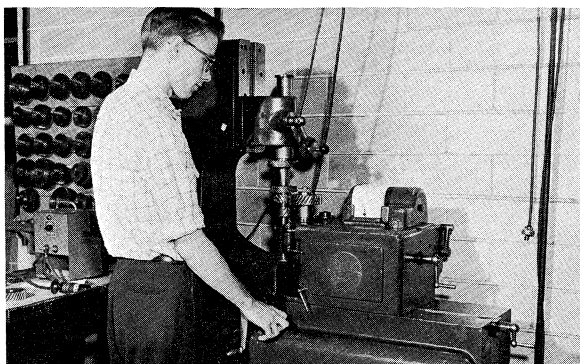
Charting a composite check of a cluster gear on a Red Liner. *Courtesy Warner Gear Div.
